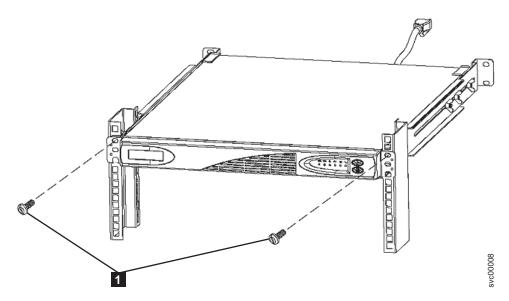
Removing the mounting screws from the 2145-1U uninterruptible power supply
